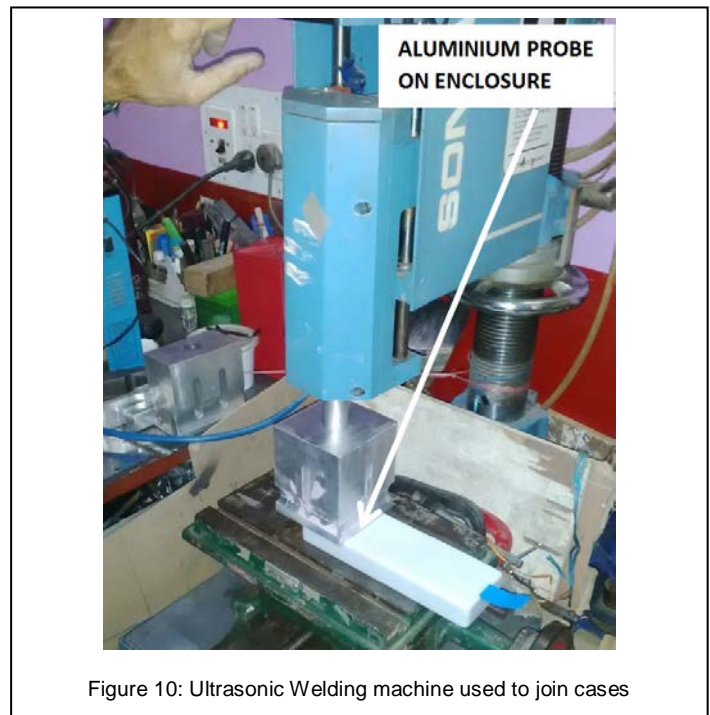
Ultrasonic Welding machine used to join cases
